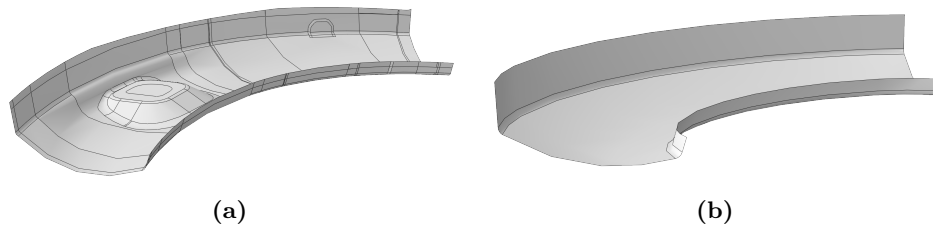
CAD views of air inlet geometry: (a) industrial part, (b) simplified geometry
